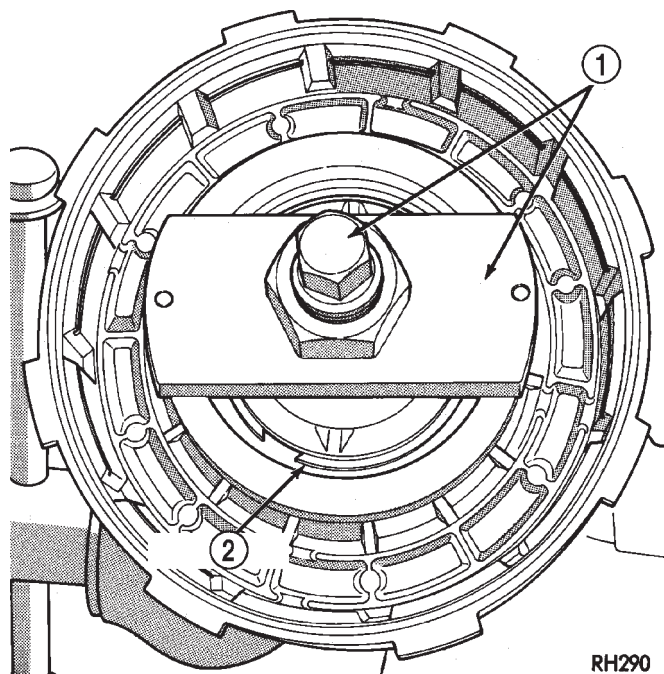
Removing Front Clutch Spring Retainer Snap Ring
